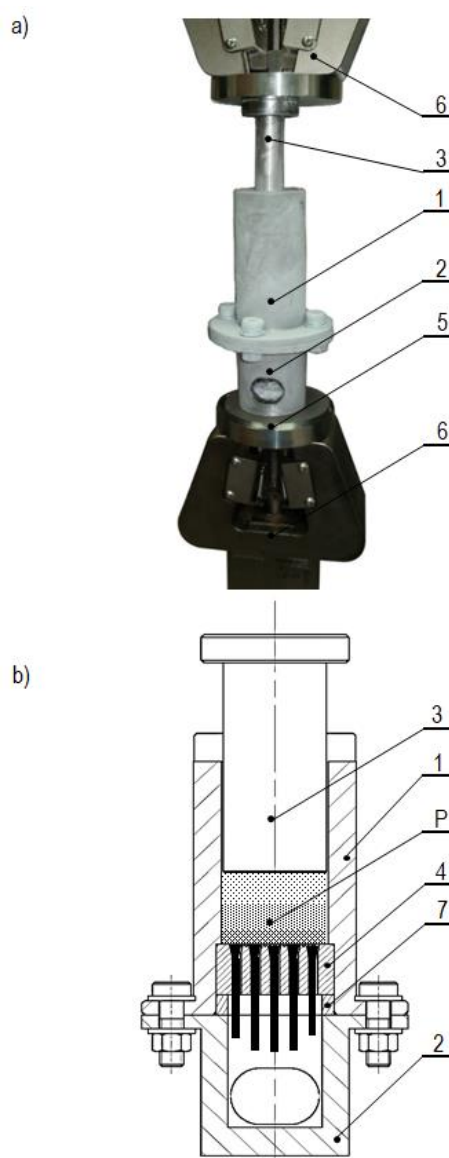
Test set-up a) grips of the MTS strength tester including the test assembly and alignment jig, b) cross-section of the test assembly 1 – cylindrical extrusion tube, 2 – base of the test assembly, 3 – piston, 4 – multi-channel die plate 5 – right-angle jig, 6 – grips of the strength tester, 7 – spacing ring, P – compressed dry ice snow (Górecki et al., 2013)
